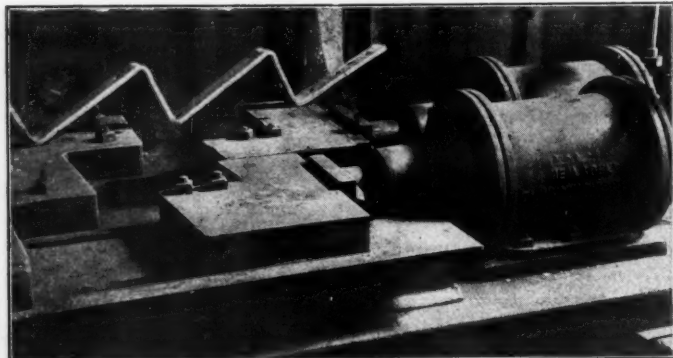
Bulldozer and Dies for Making Caboose Steps.
